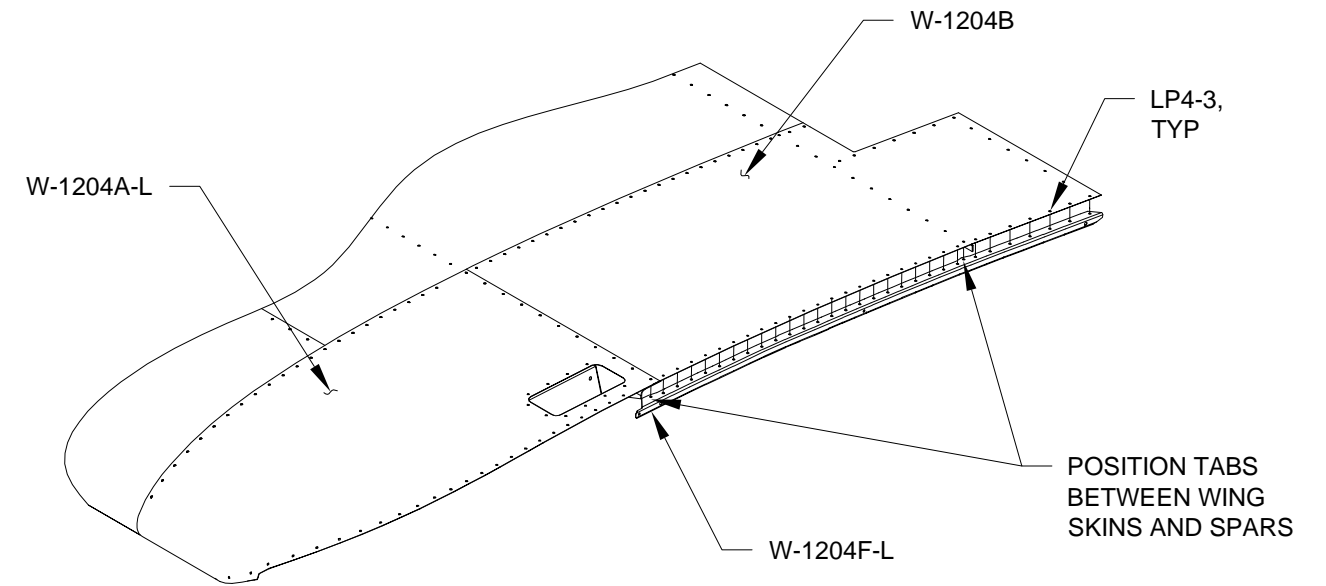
ATTACHING THE AFT WING TIP RIB
